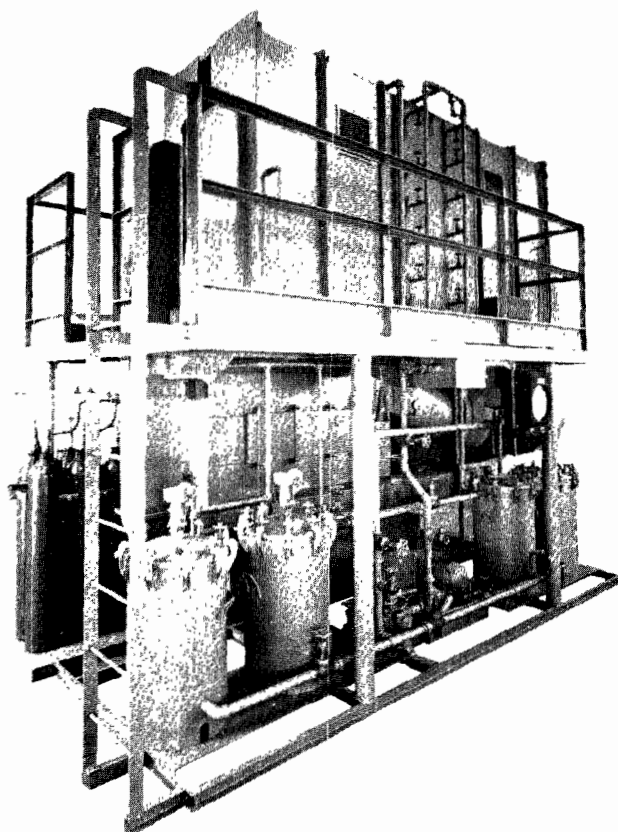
Side view of a flowcoating machine (Industrial Systems, Inc., Southgate, Calif.).
